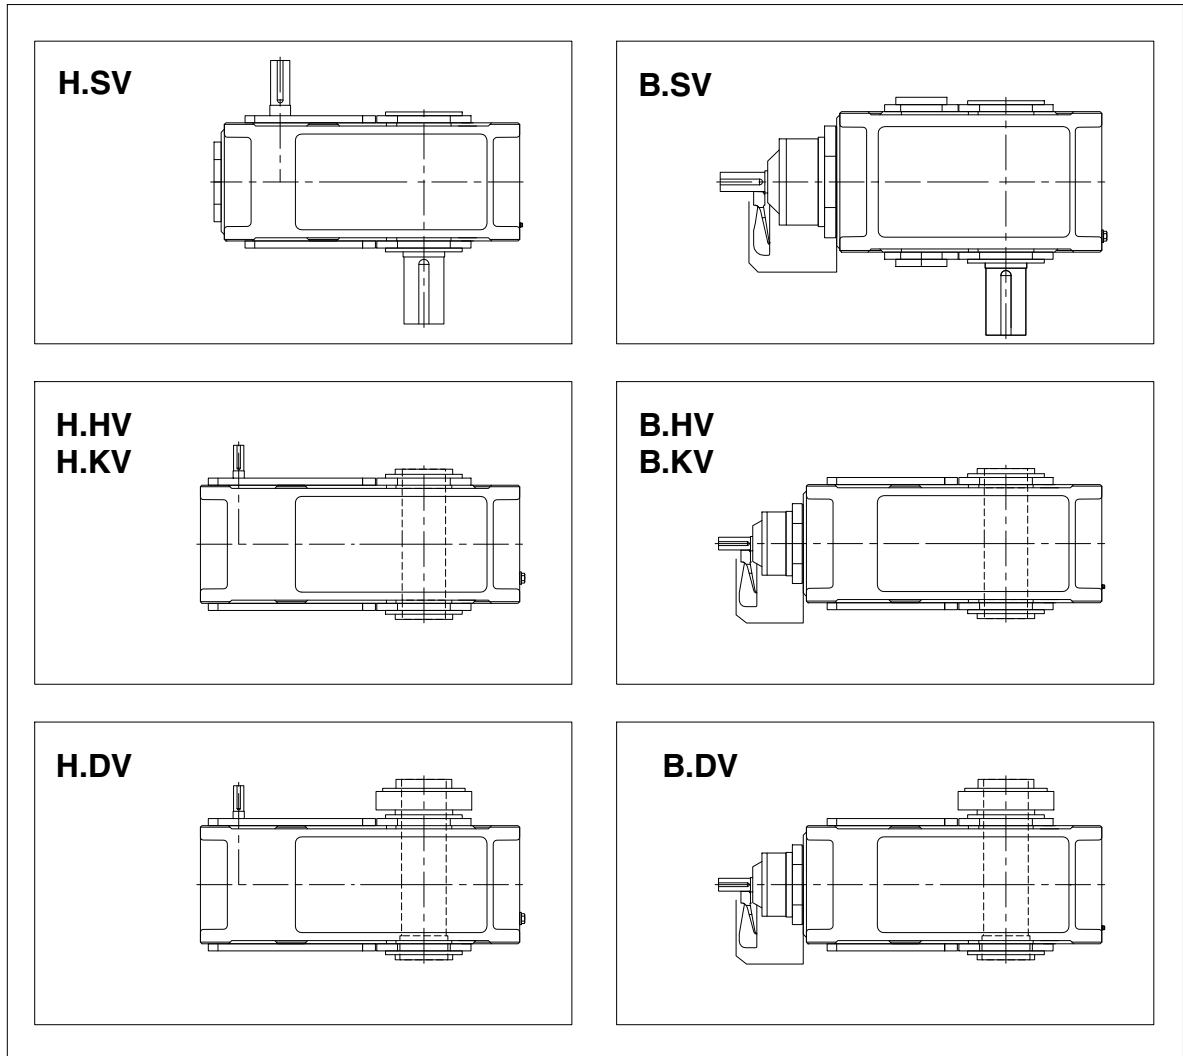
Helical-gear unit and bevel-helical gear unit of types H..V and B..V
